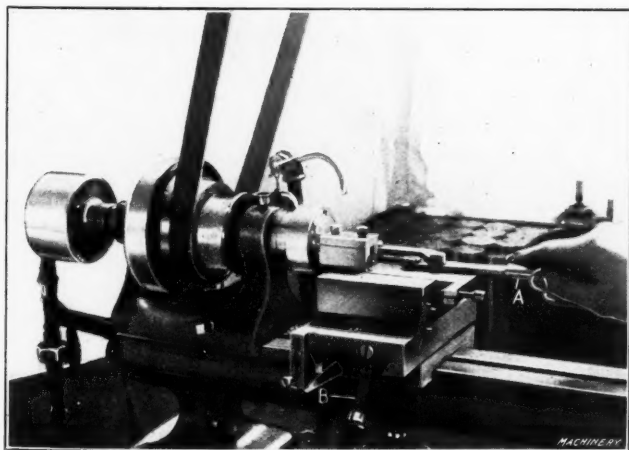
Lathe equipped with Air-chuck for facing Plates
